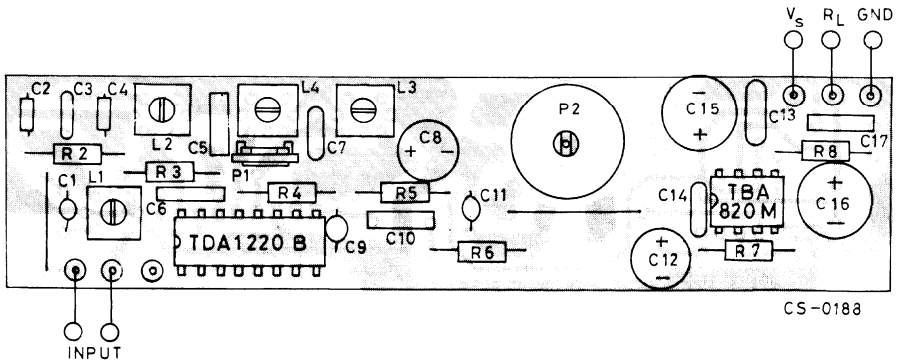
P.C. board and component layout of the circuit of fig. 18
